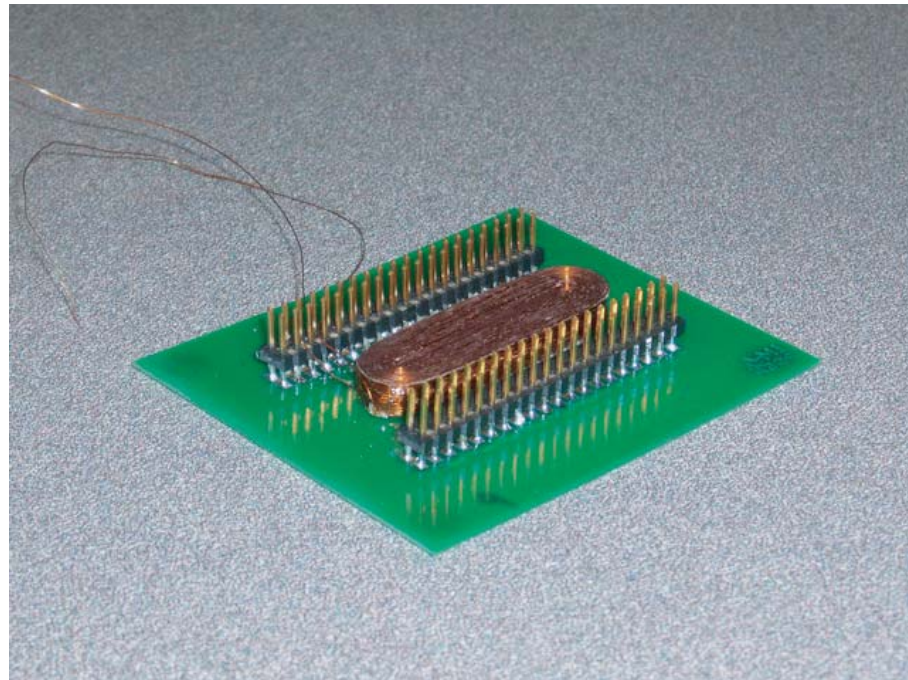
The inside surface of the PCB showing the racetrack coil and the contacts for the 32 element Hall array
